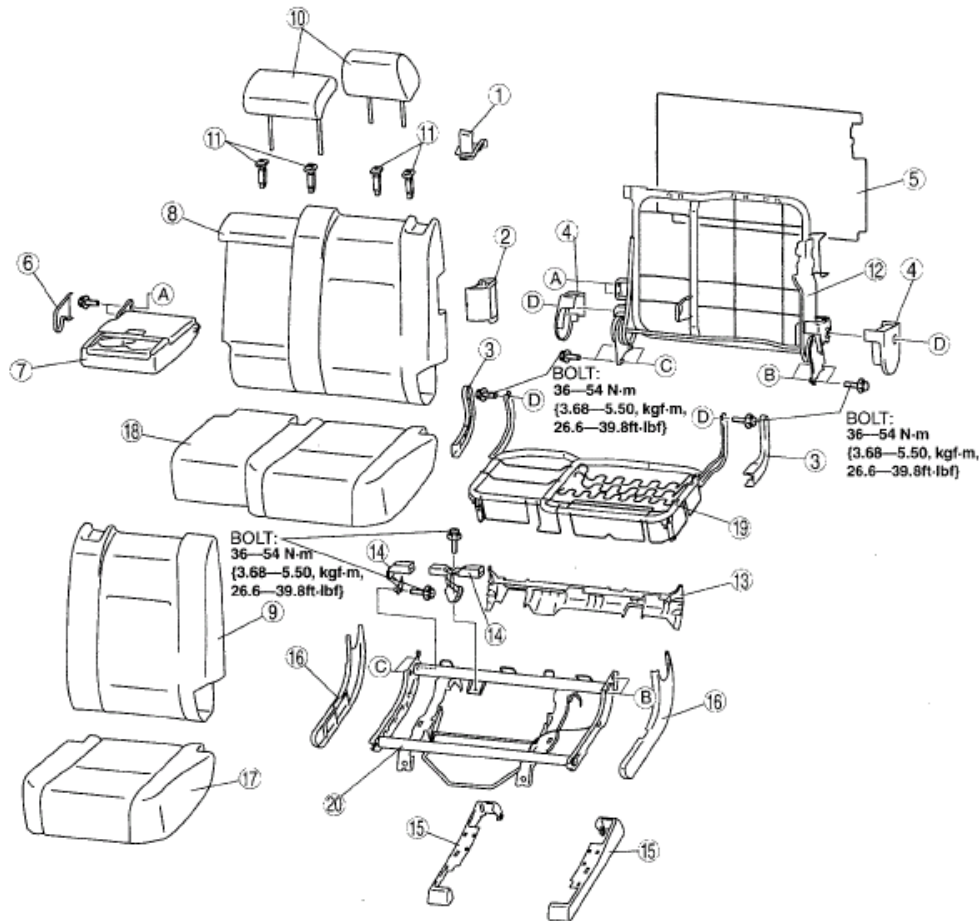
Identifying Second-Row Seat, Bolt With Cover & Torque Specifications
